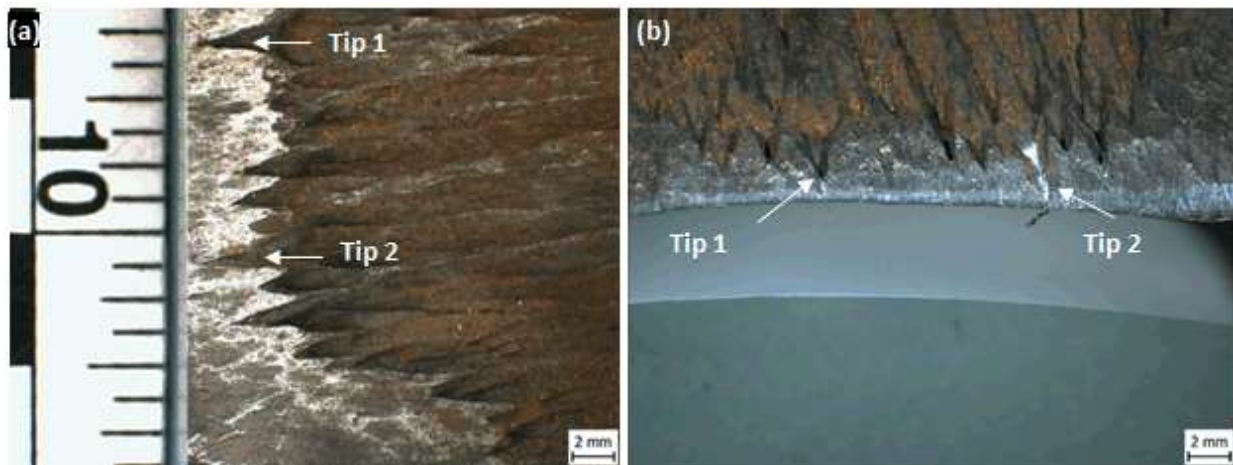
(a) Top View of Specimen C021A3C2; (b) Tilted View of Specimen C21A3C2 Sectioned Near the Groove Tips
